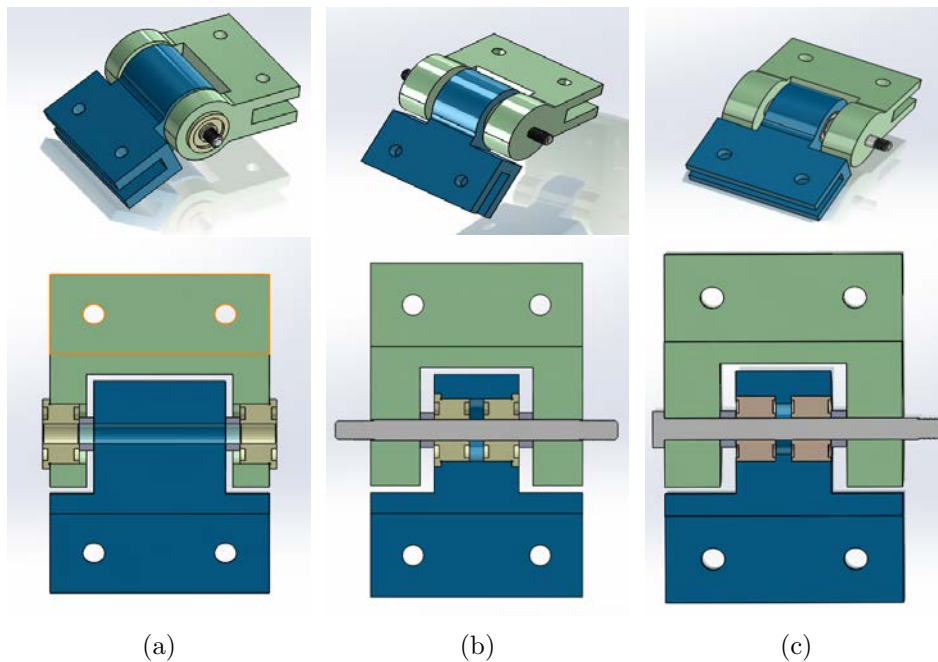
(a) Joint with flanged bearing on the outside. (b) Joint with flanged bearing on the inside. (c) Joint with bearing without flange on the inside.
